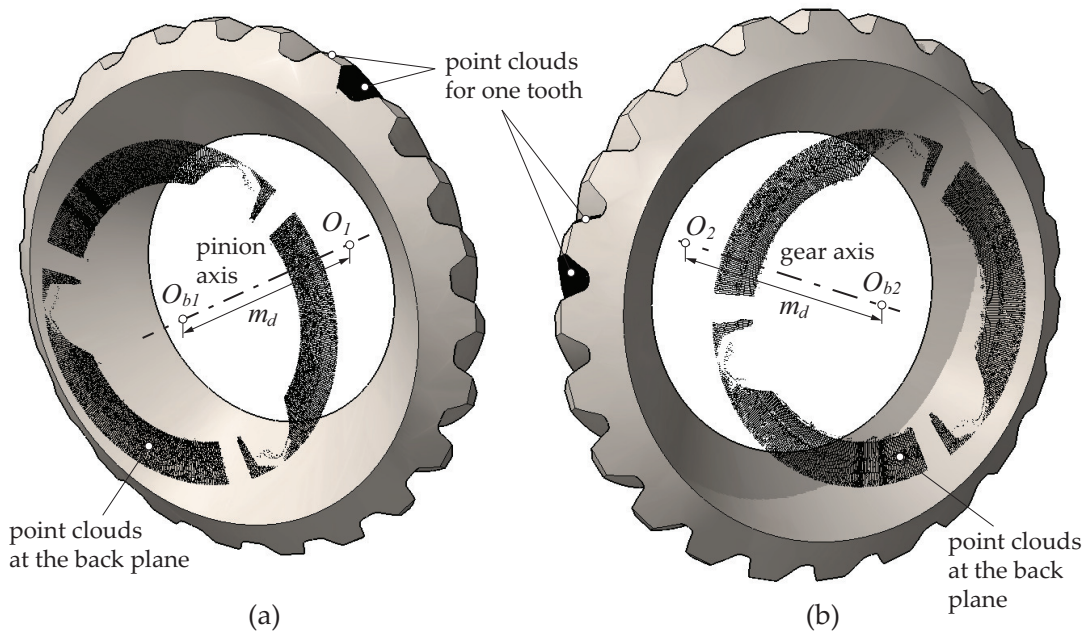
Illustration of the point clouds and the reconstructed models for: (a) pinion and (b) gear.
